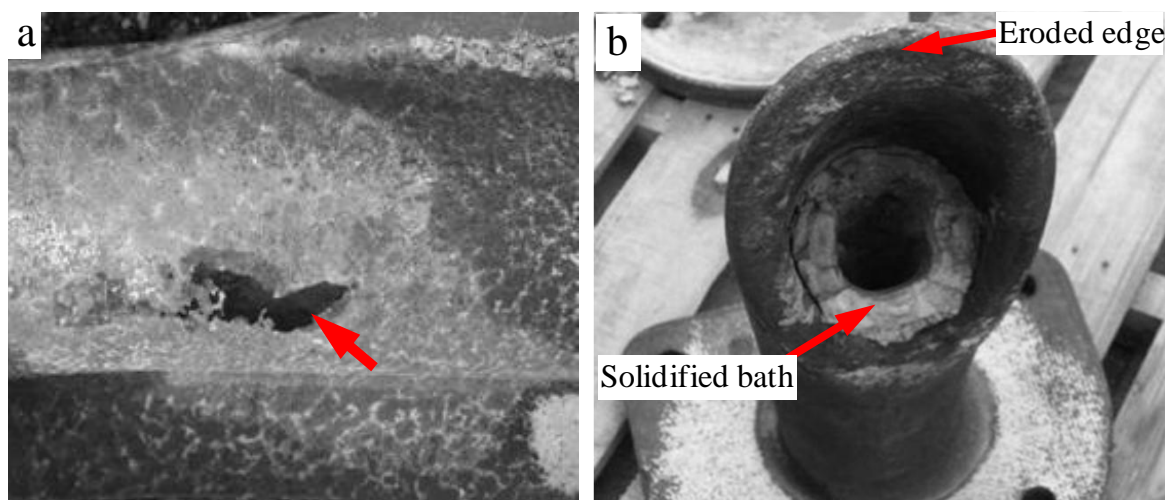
a) A hole through the top tapping pipe wall, b) an after-service bottom tapping pipe section.
